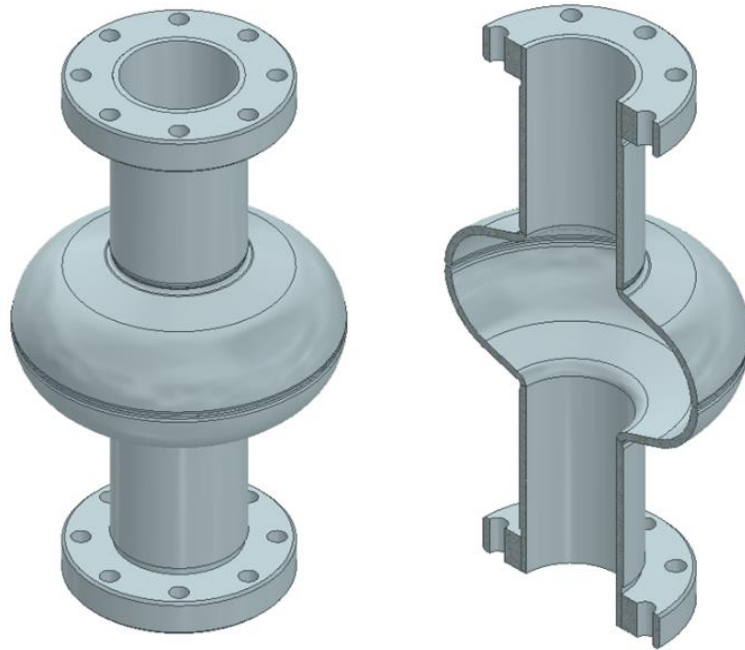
Drawing of the 2.6 GHz single cell cavity used for the deposition. The cavity was designed and built in Fermilab.
